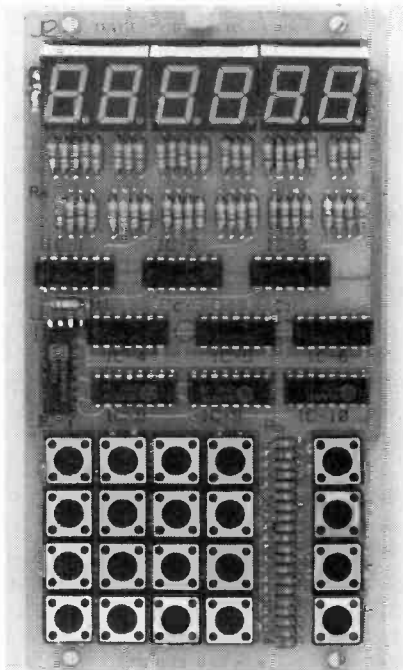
COMPLETED KEYPAD/DISPLAY board. Mount each display using half a socket under the rear row of pins only, to provide better viewing.
